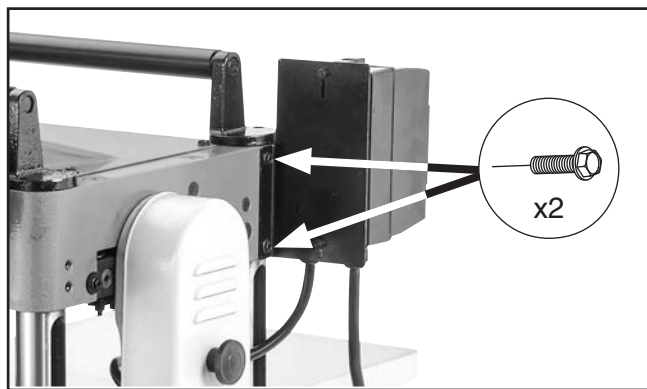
Magnetic switch installed (Models G0453W and G0454W).
